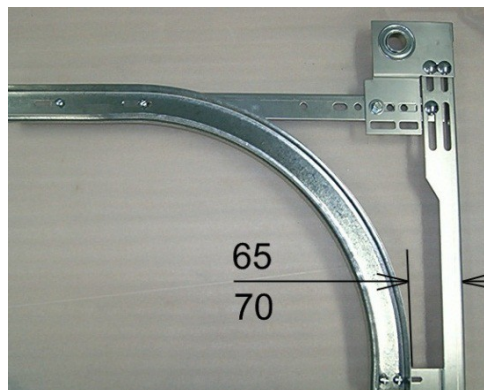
Mounting Horizontal Track/Support Angle & End Bracket
